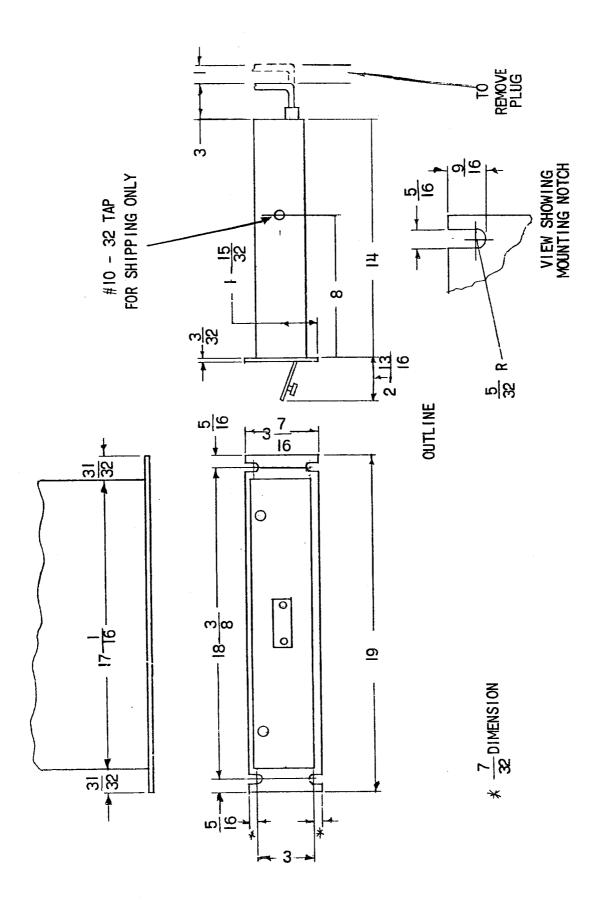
(0227A2036) Outline and Mounting Dimensions for Type SLA56E Relay
